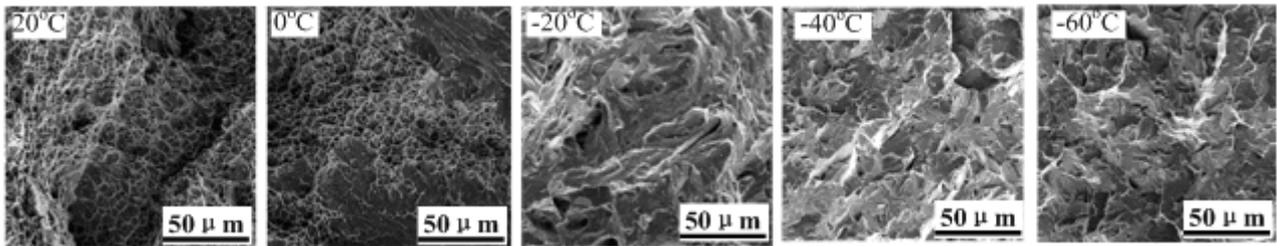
Micro-morphology of Fracture Surfaces for Weld Metal of 960Mpa Steel at Five Different Temperatures
